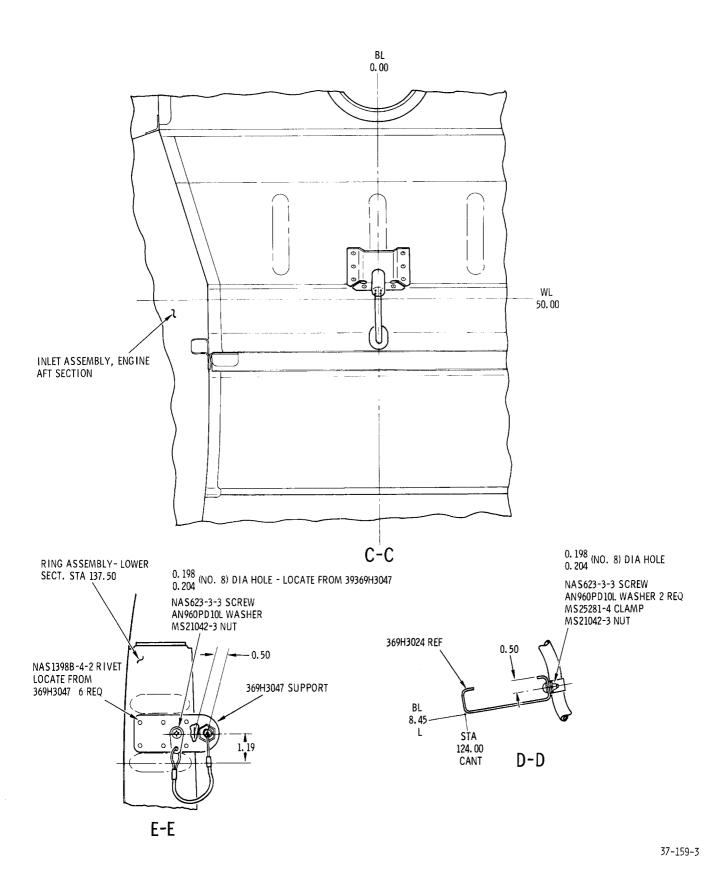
Installation of engine compressor water wash kit (sheet 3 of 3)
